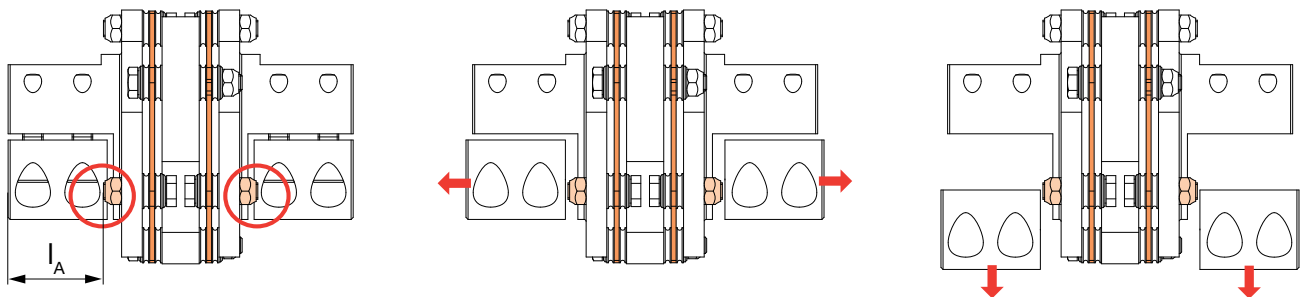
Axial displacement of the half-shells during radial assembly/disassembly (only necessary on Type 951.881)
